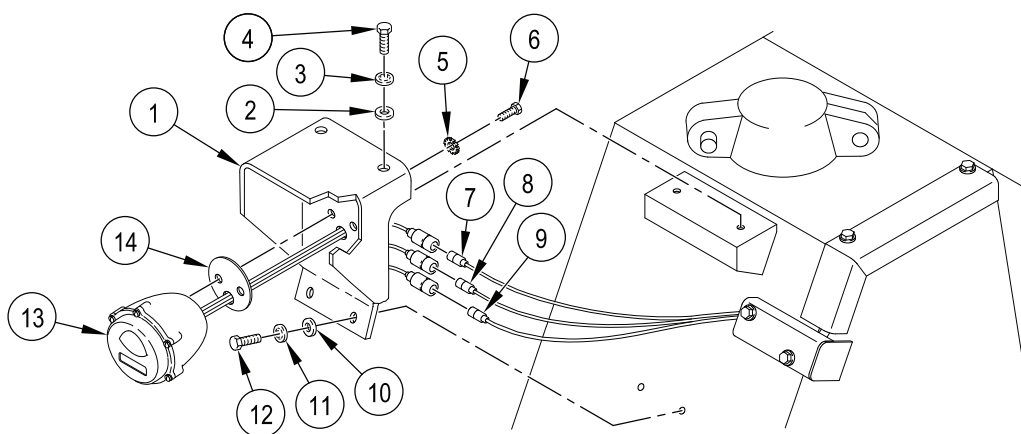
Stoplight-Taillight Mounting Bracket Removal
